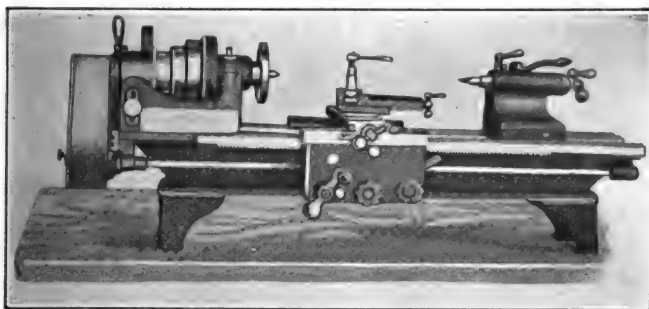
The lathe shown in Fig. 7 mounted for bench work.
